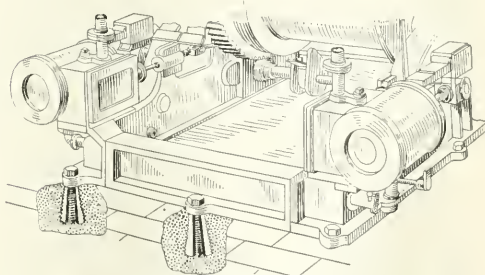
EXPANSION ANCHORS ON HOIST BED
